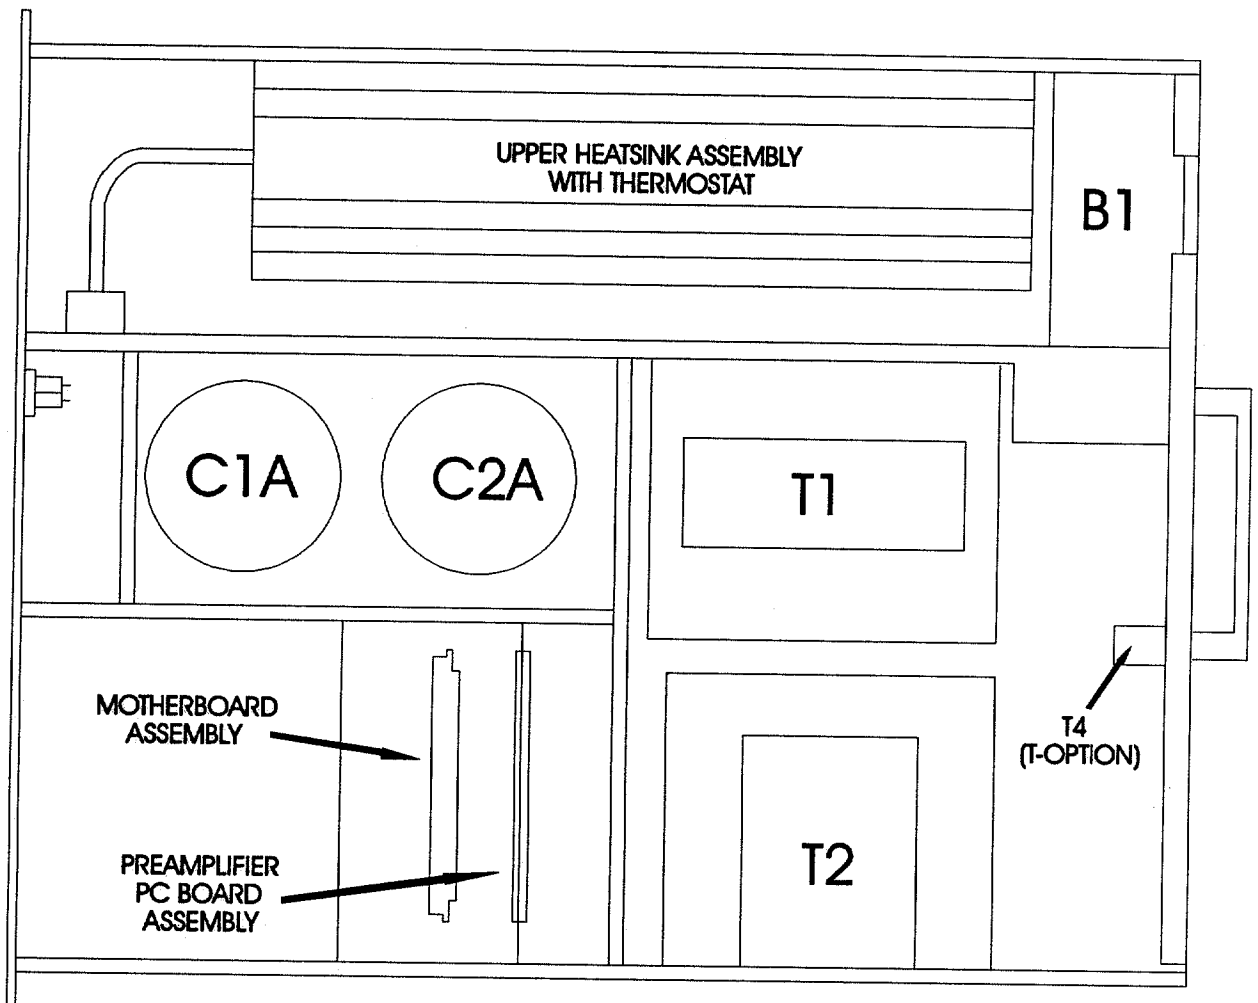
Model 1751SLE (Top View, Cover Removed)
